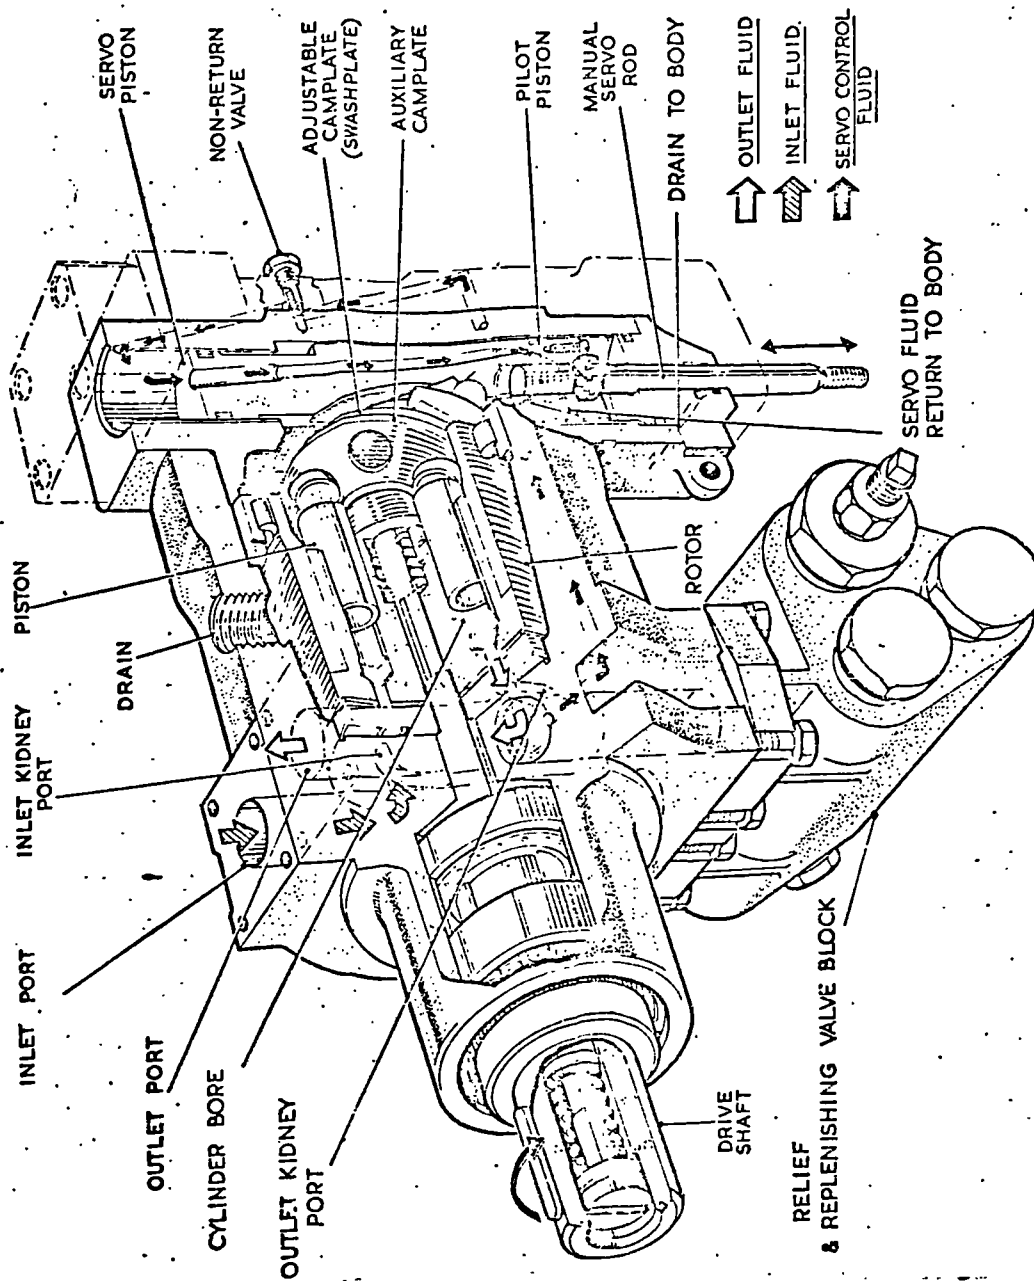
CROSS SECTIONAL VIEW OF LUCAS TYPE PM AXIAL PISTON PUMP
